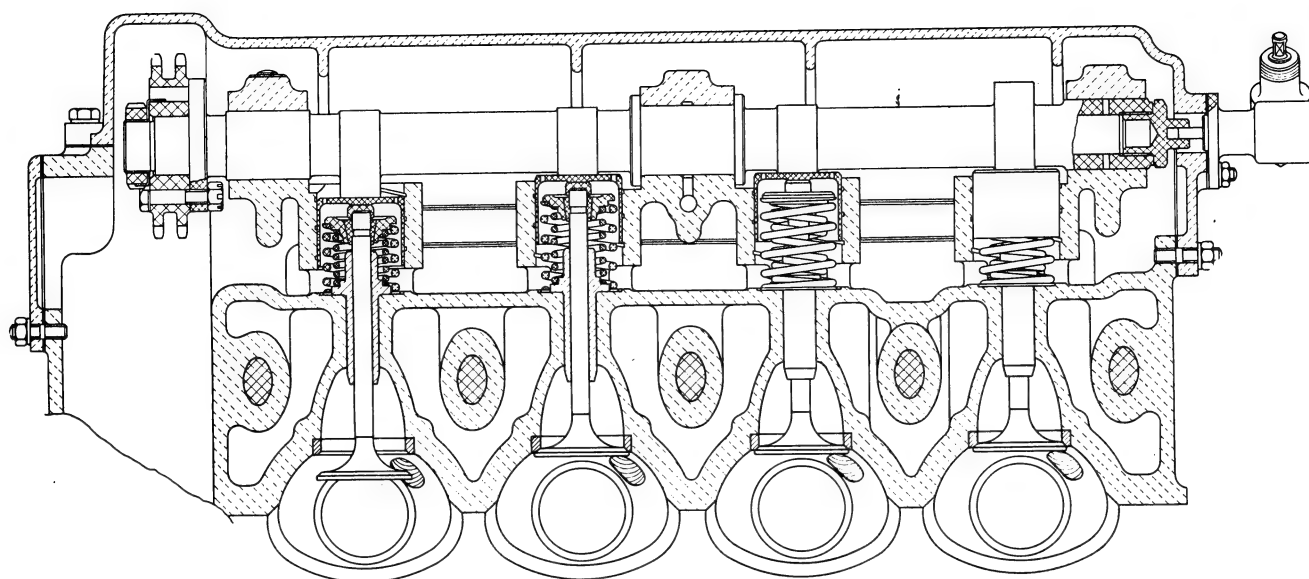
Sectional view of 118 B.000 engine head across intake valve camshaft and tachometer drive.
